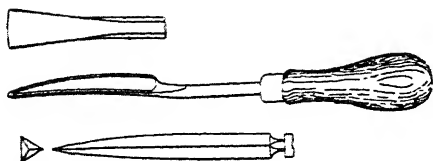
SCRAPERS FOR REMOVING METAL FROM BEARING AND OBTAINING ACCURATE FIT OF SHAFT
